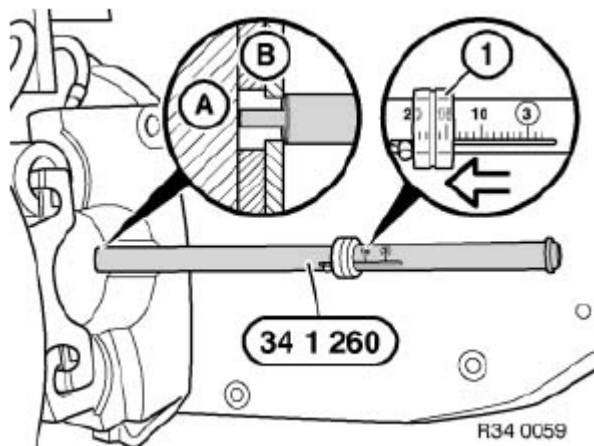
Inserting Special Tool 34 1 260 Through Rim
